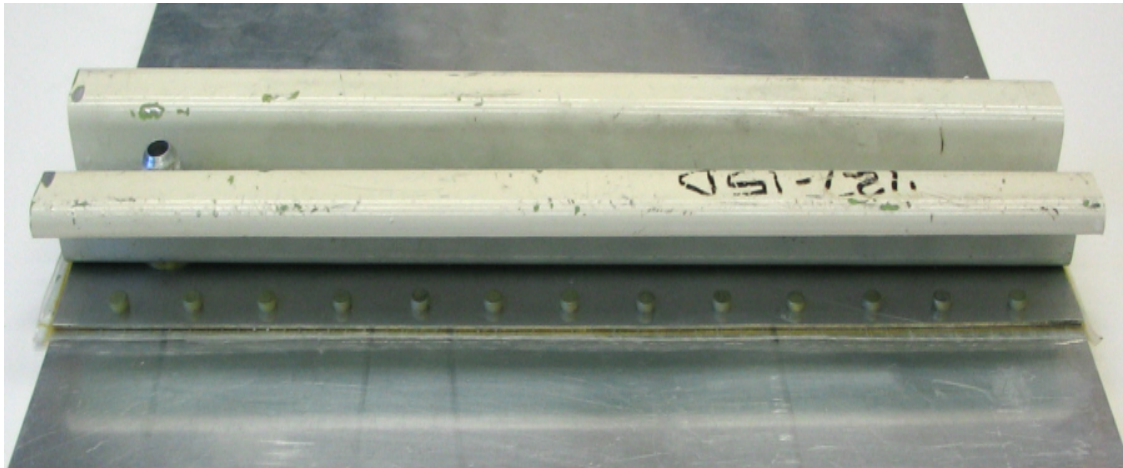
Overall View of Rear Surface of Hydraulic Pillowing Lap-Joint with Stringer.
